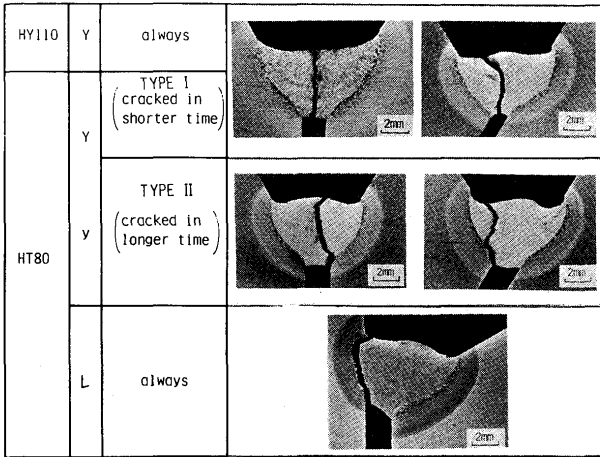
Path of root cracking in transverse crosssection of welded zone. L means single bevel groove.
